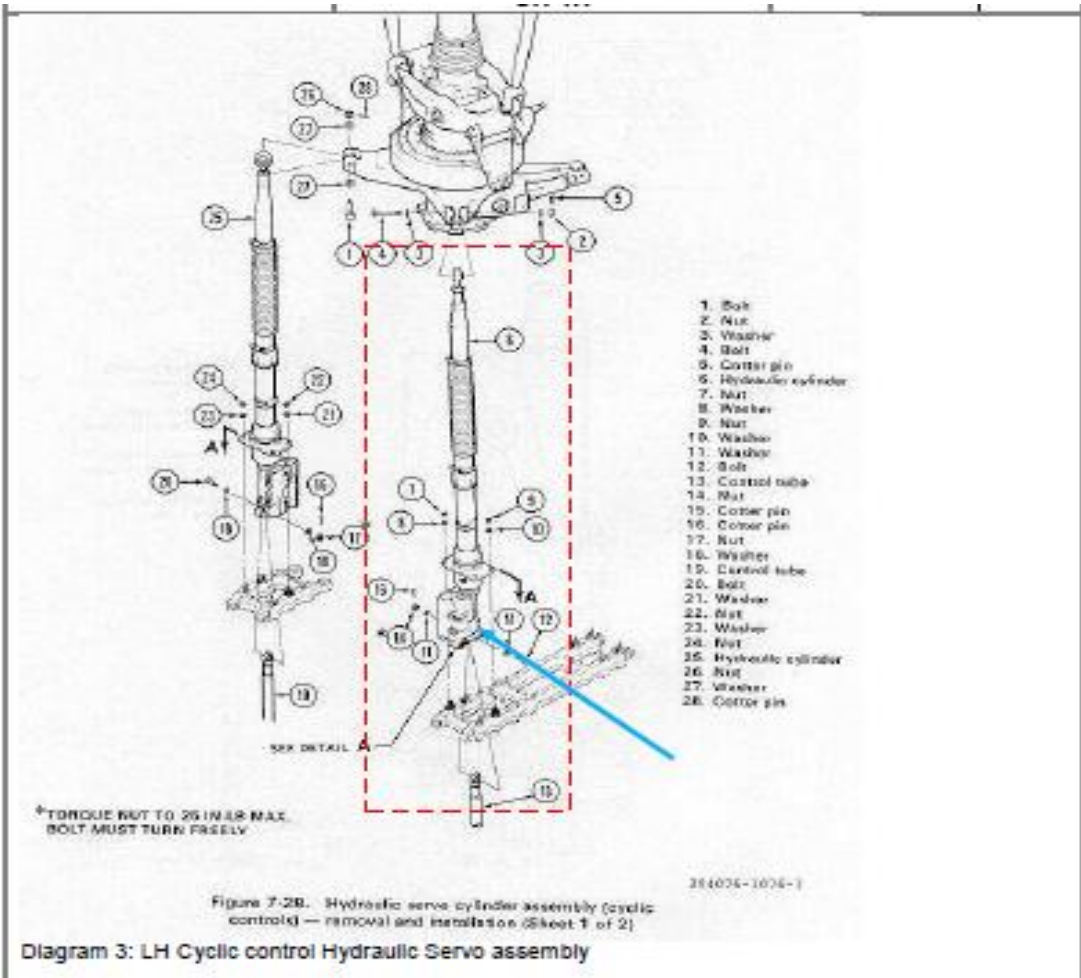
Hydraulic servo cylinder assembly (cyclic control) - removal and installation (Sheet 1 of 2)
